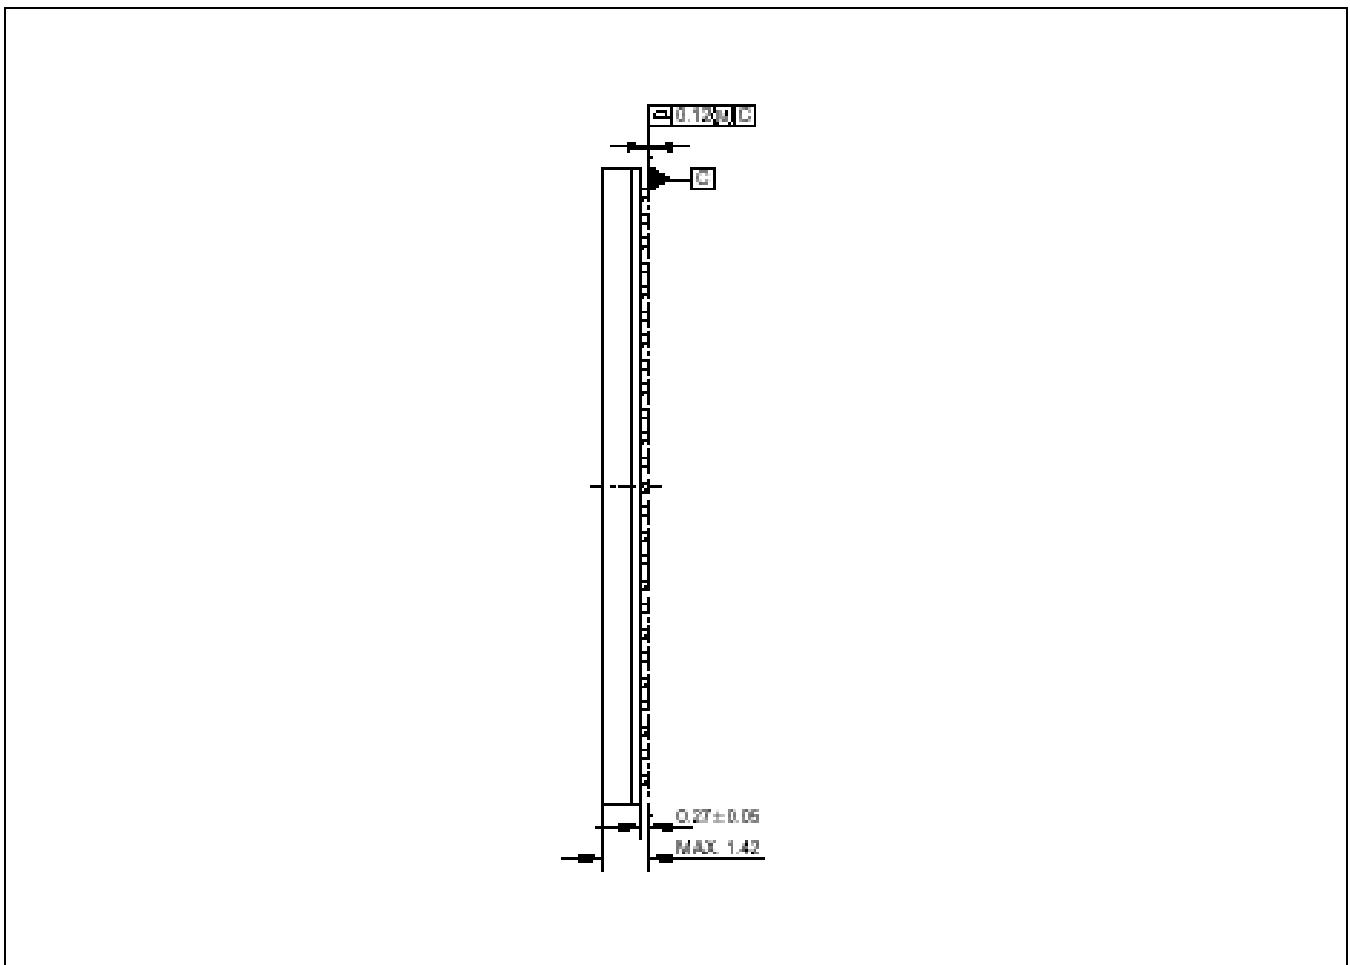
S5PV210 Package Dimension (584-FCFBGA) – Side View
